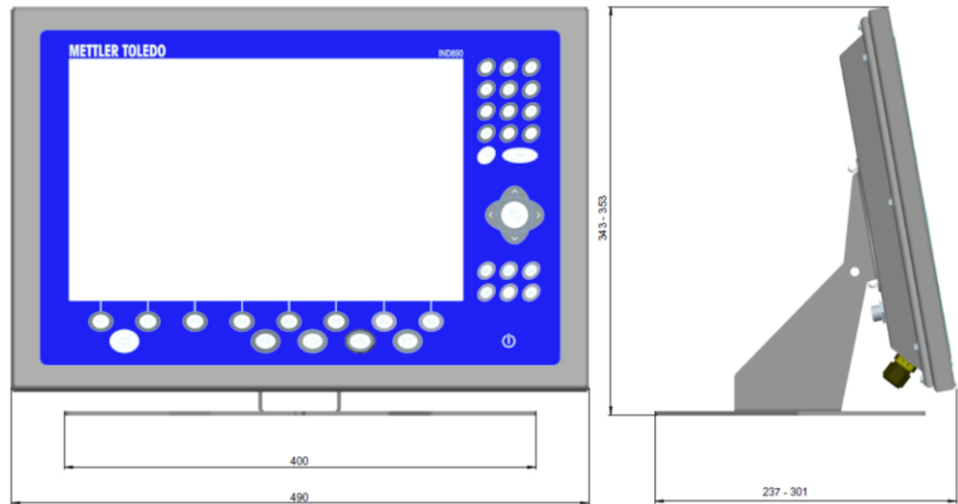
Dimensions of IND970-15. Desk/Panel Installation
